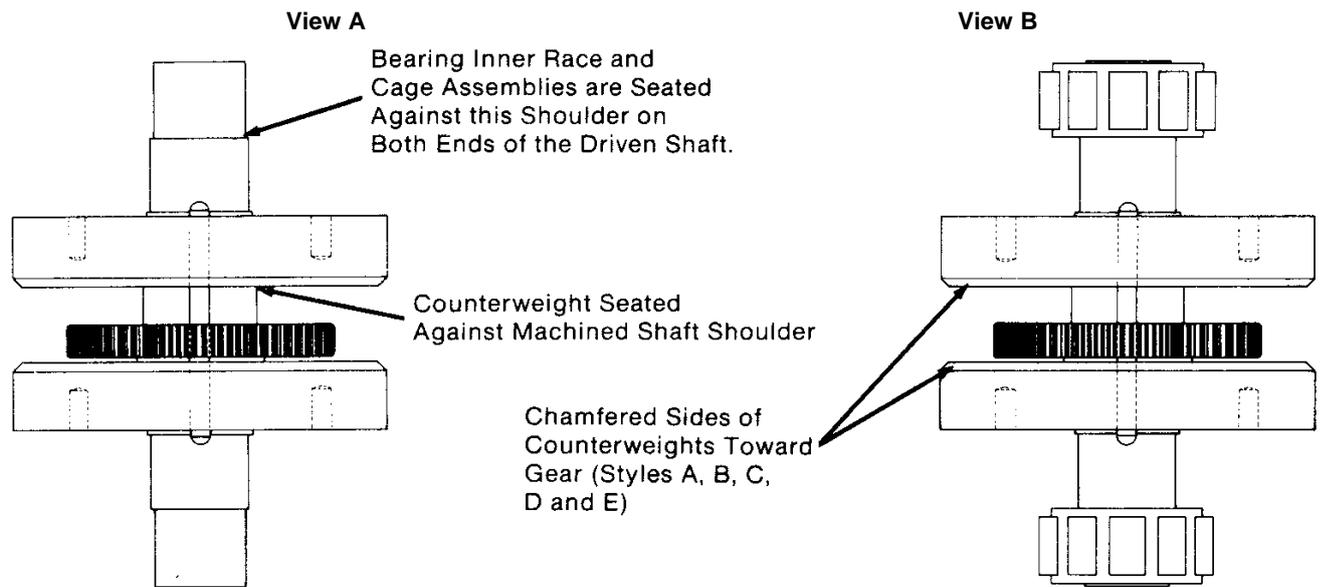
Installation of second counterweight and bearing inner races with roller cages on driven shaft.
